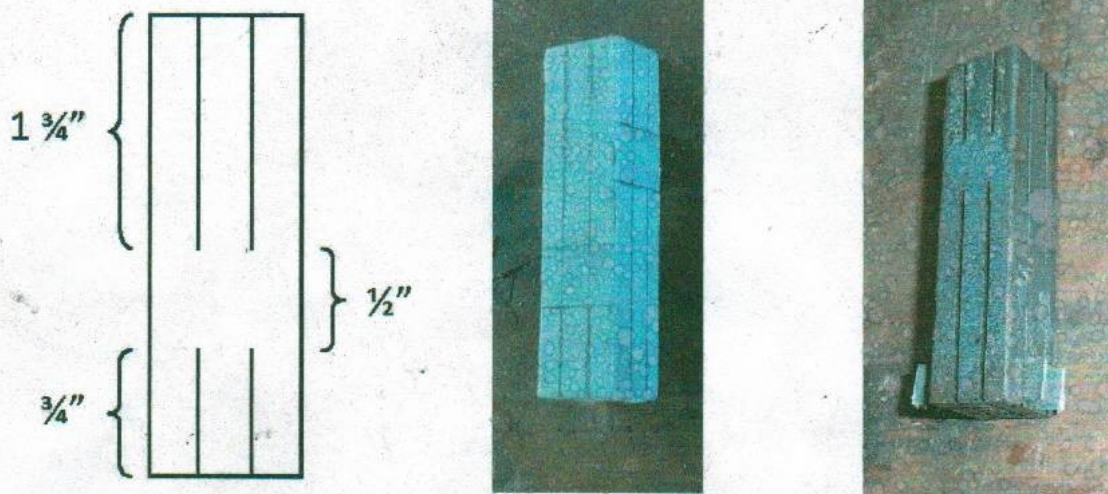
Cut layout (left), blank with marked cuts (center), cut blank with spacers (right)
